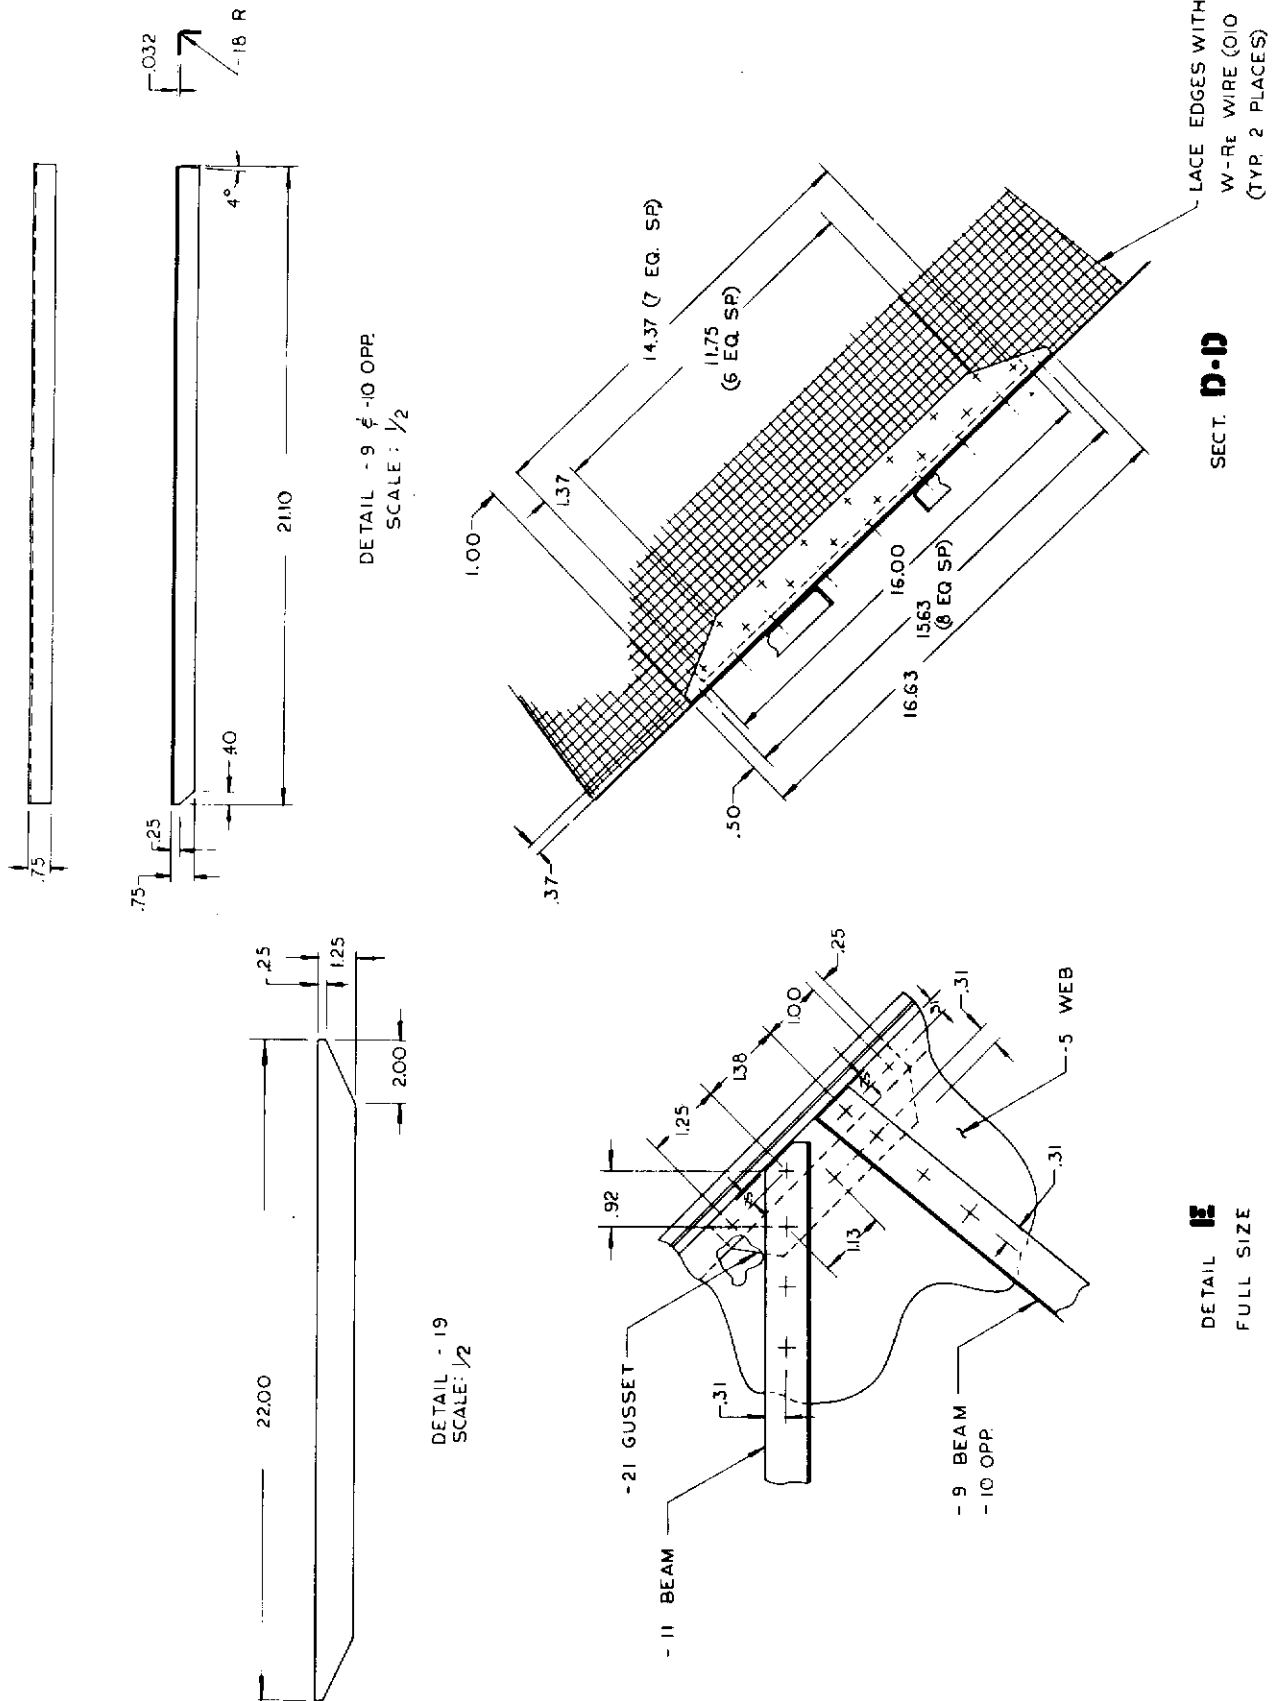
FINAL DESIGN FRONTAL STRUCTURE; Detailed Drawing (Sheet 2 of 6)
